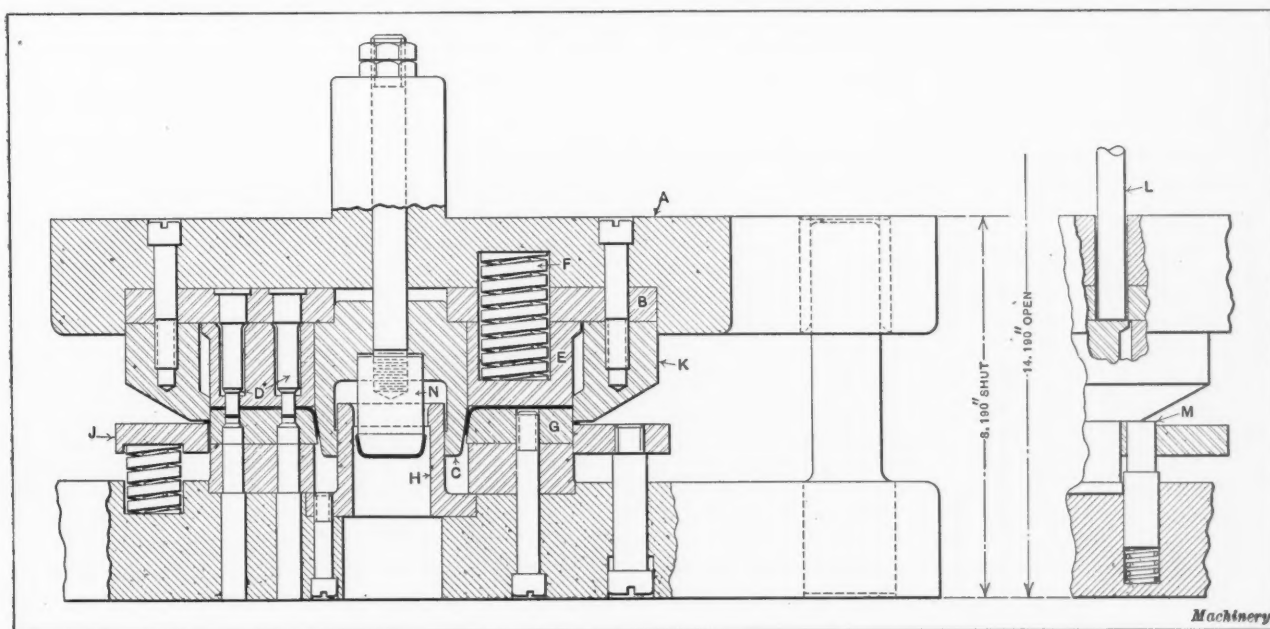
Compound Die of the Sub-press Type used in making Tractor Stampings
